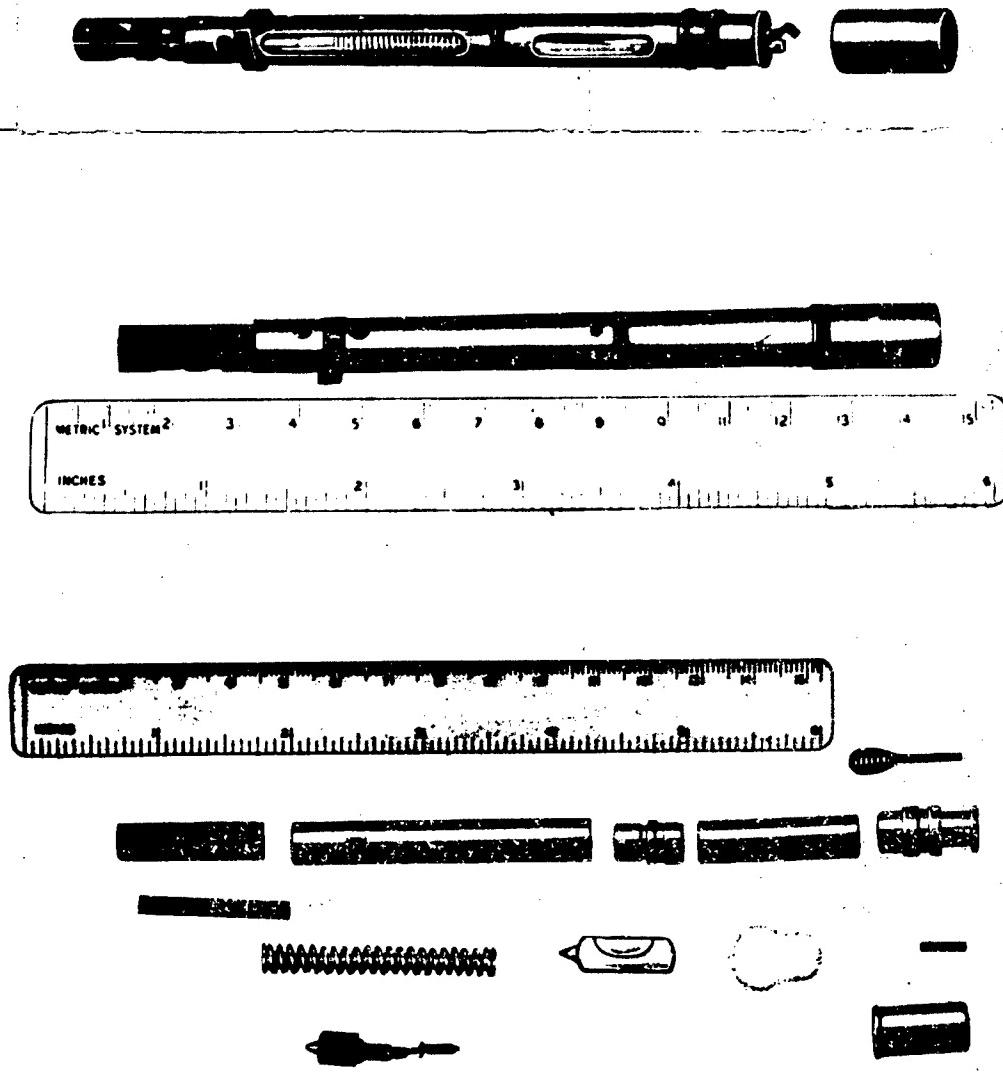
Cut-away model, assembled model, exploded model — Mark II Pencil.
